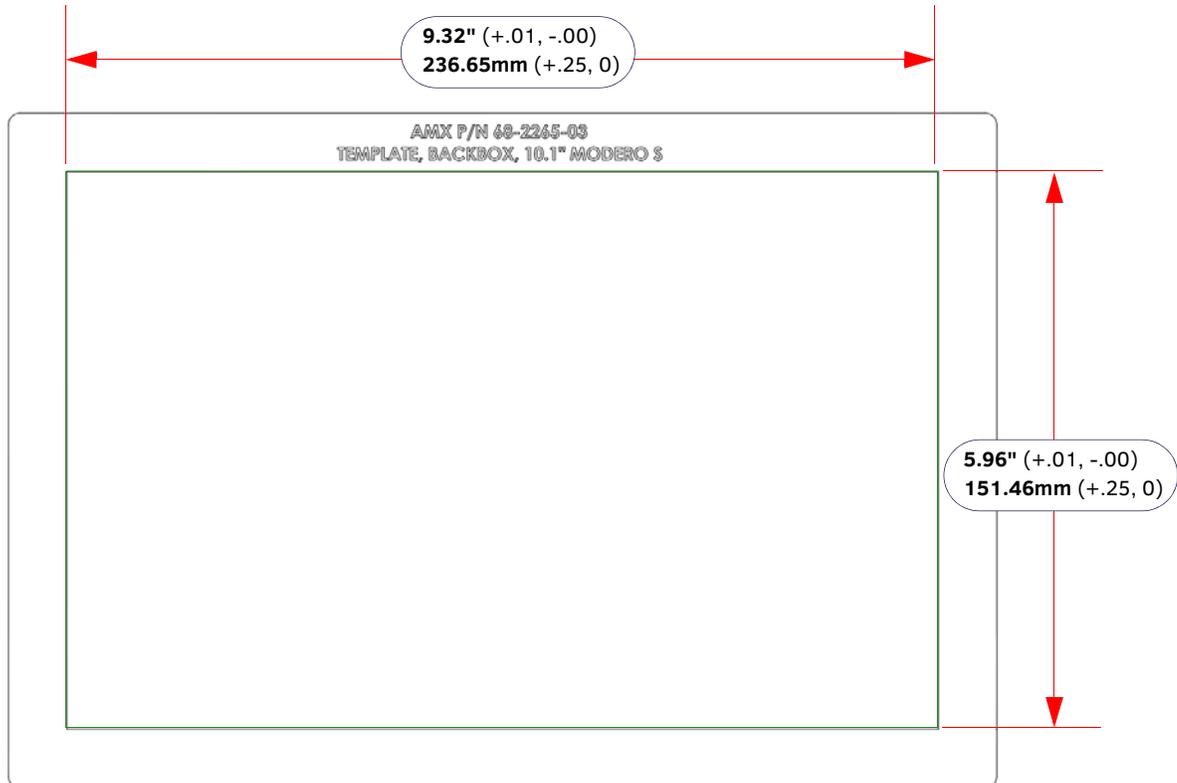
MSD-1001-L/2 Cutout Dimensions
